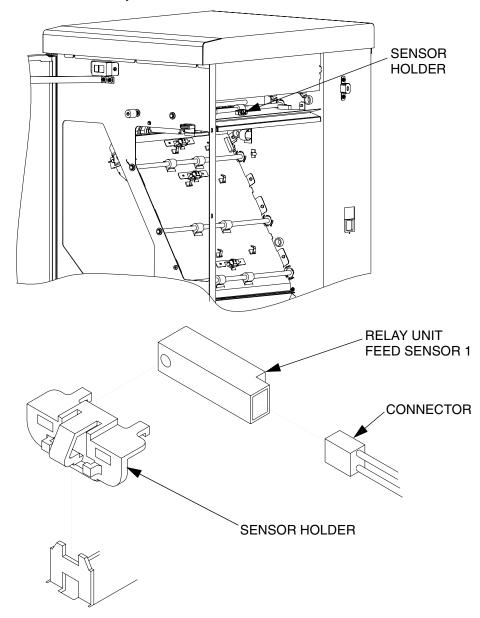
Removal of the Relay Unit Feed Sensor 1
